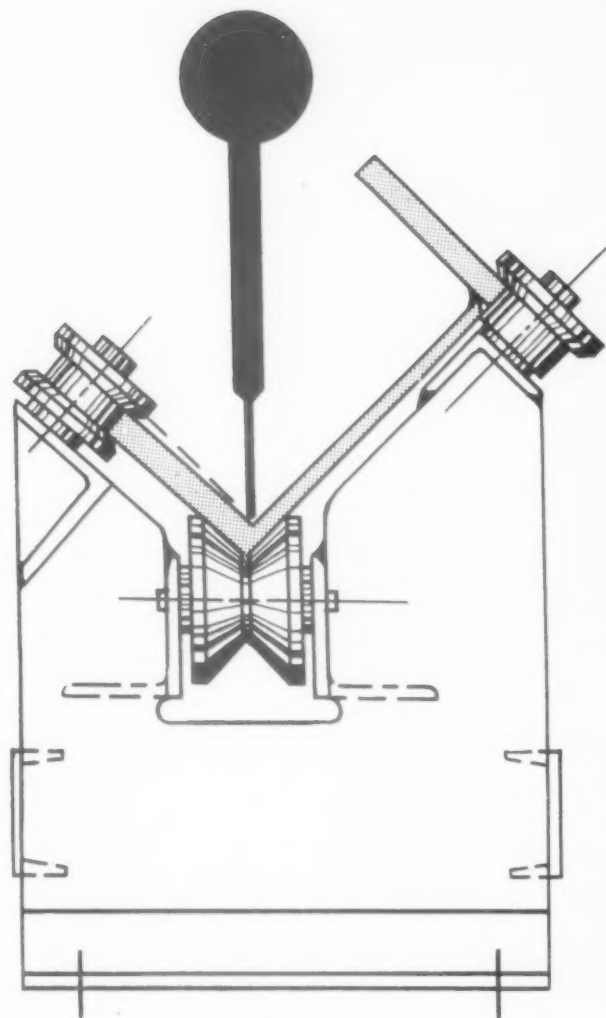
, above, assembly fixture used at Sta. 4. Fig. 8, at right, fixture used to weld fillet AB, at Sta. 5.
